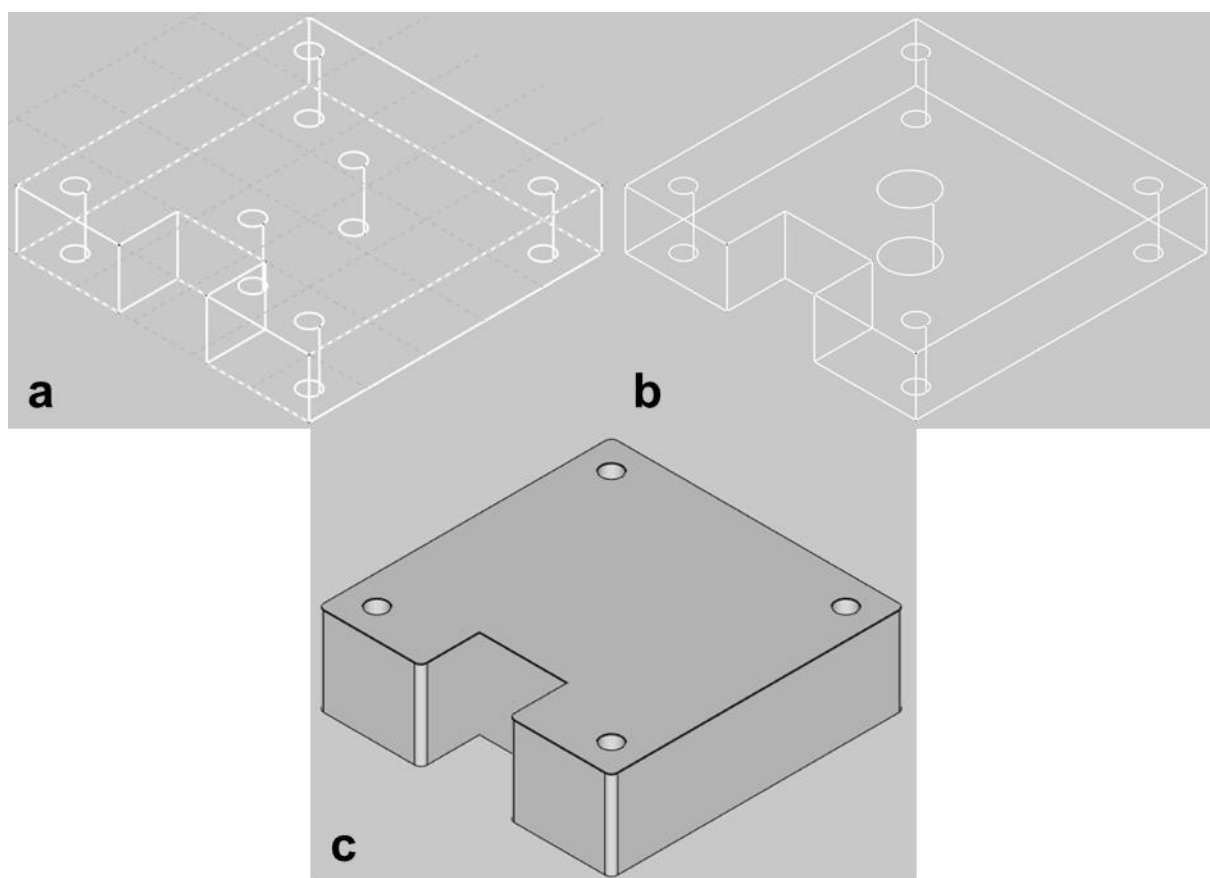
FreeCAD models for chip holder parts: a) top plate for 2D chip design, b) top plate for 3D chip design, c) bottom plate for both chip designs.
